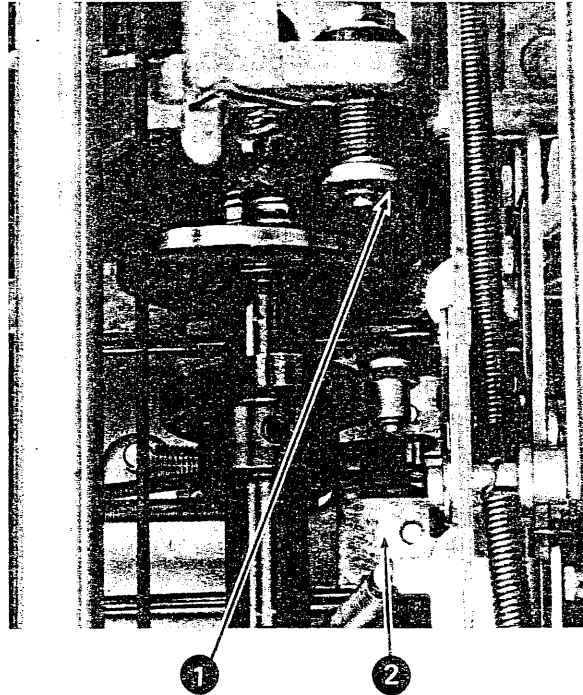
Cycle-Clutch and Cycle-Shaft Removal (Steps 14-16)
